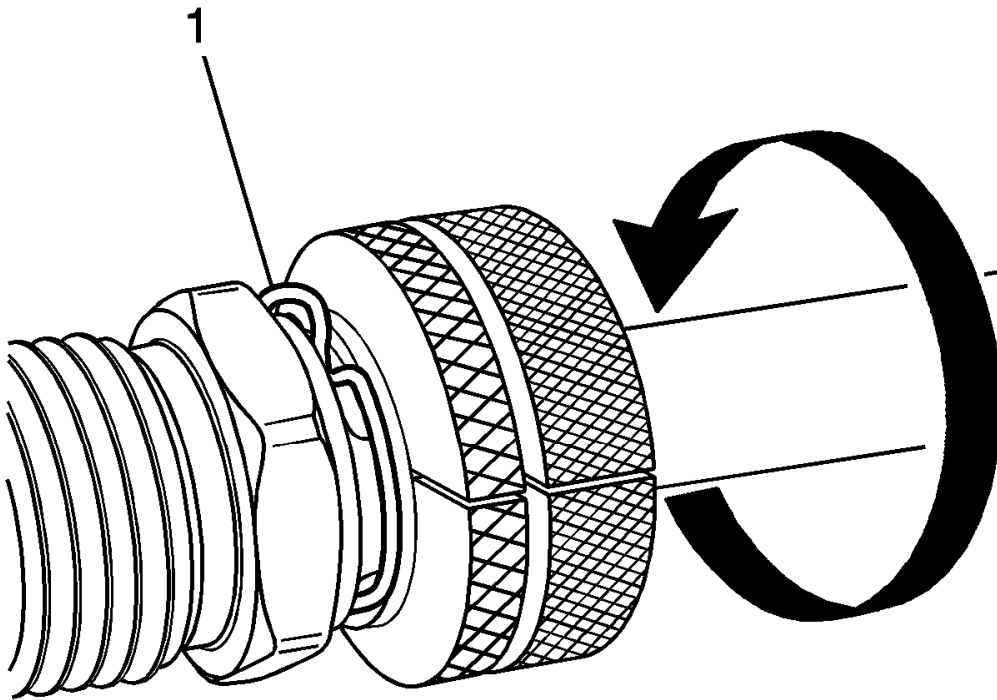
Rotating Quick-Connect Until Retainer Clip Rises Above Fitting Retainer Seat
